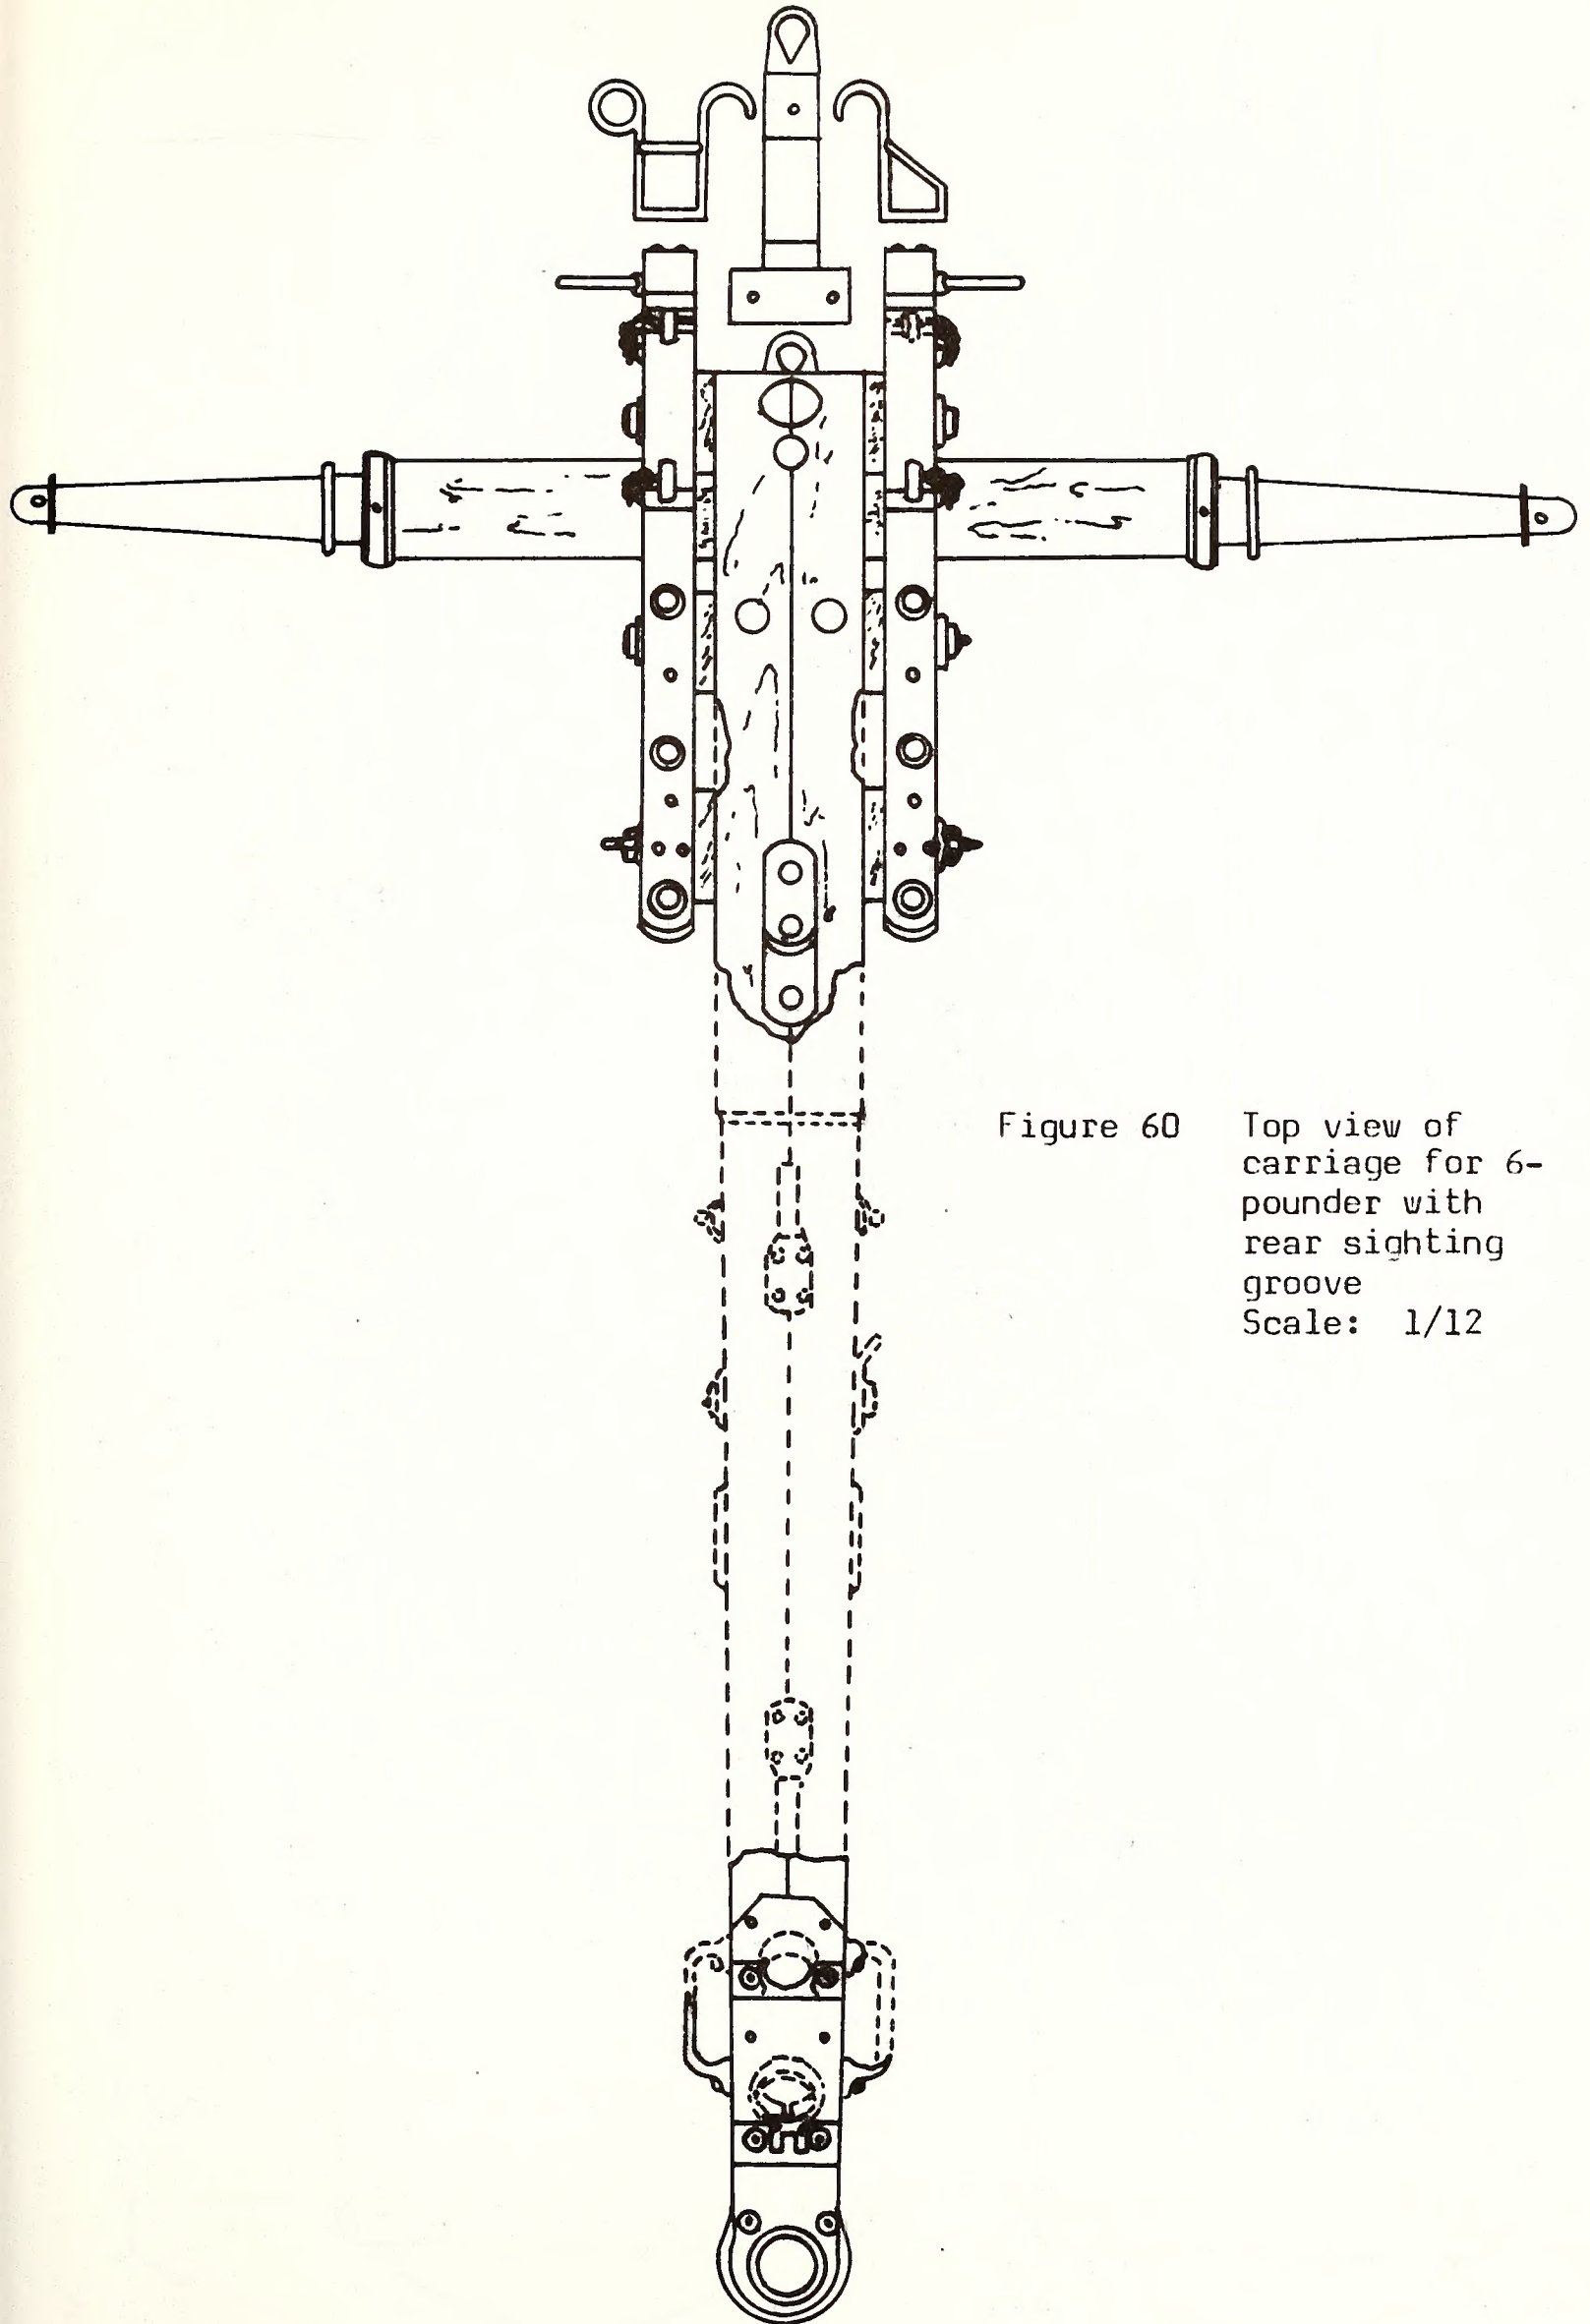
Top view of carriage for 6-pounder with rear sighting groove
